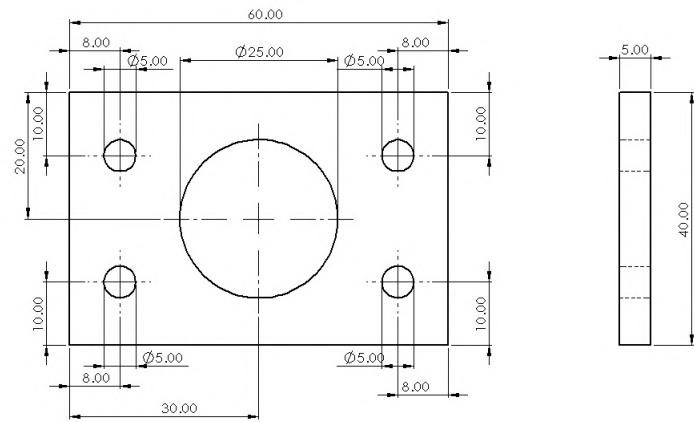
2D Drawing of the spring 1st spring holder (All dimensions are in mm)
